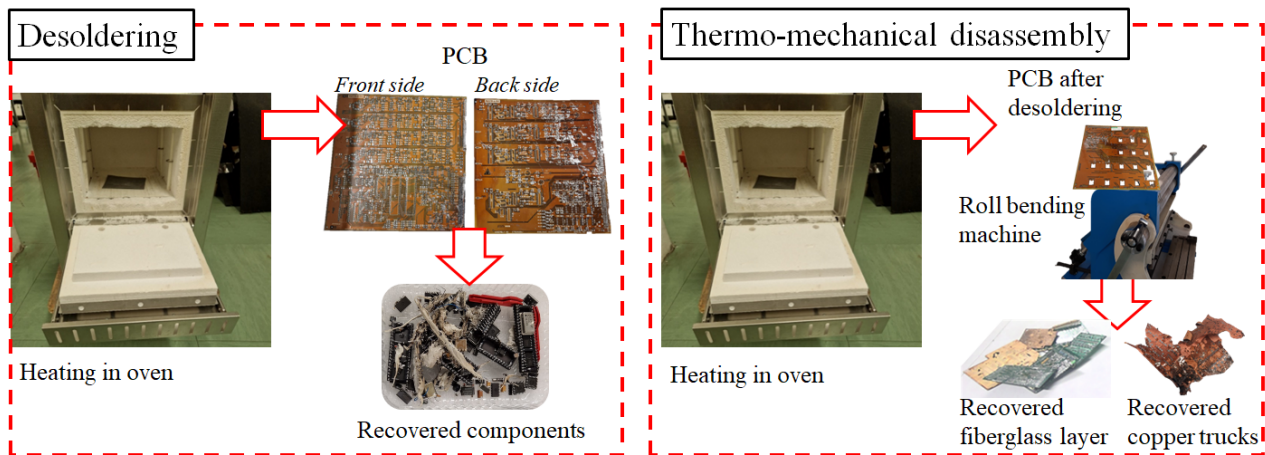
Desoldering and thermo-mechanical disassembly to recover the constituents of the electronic board.
